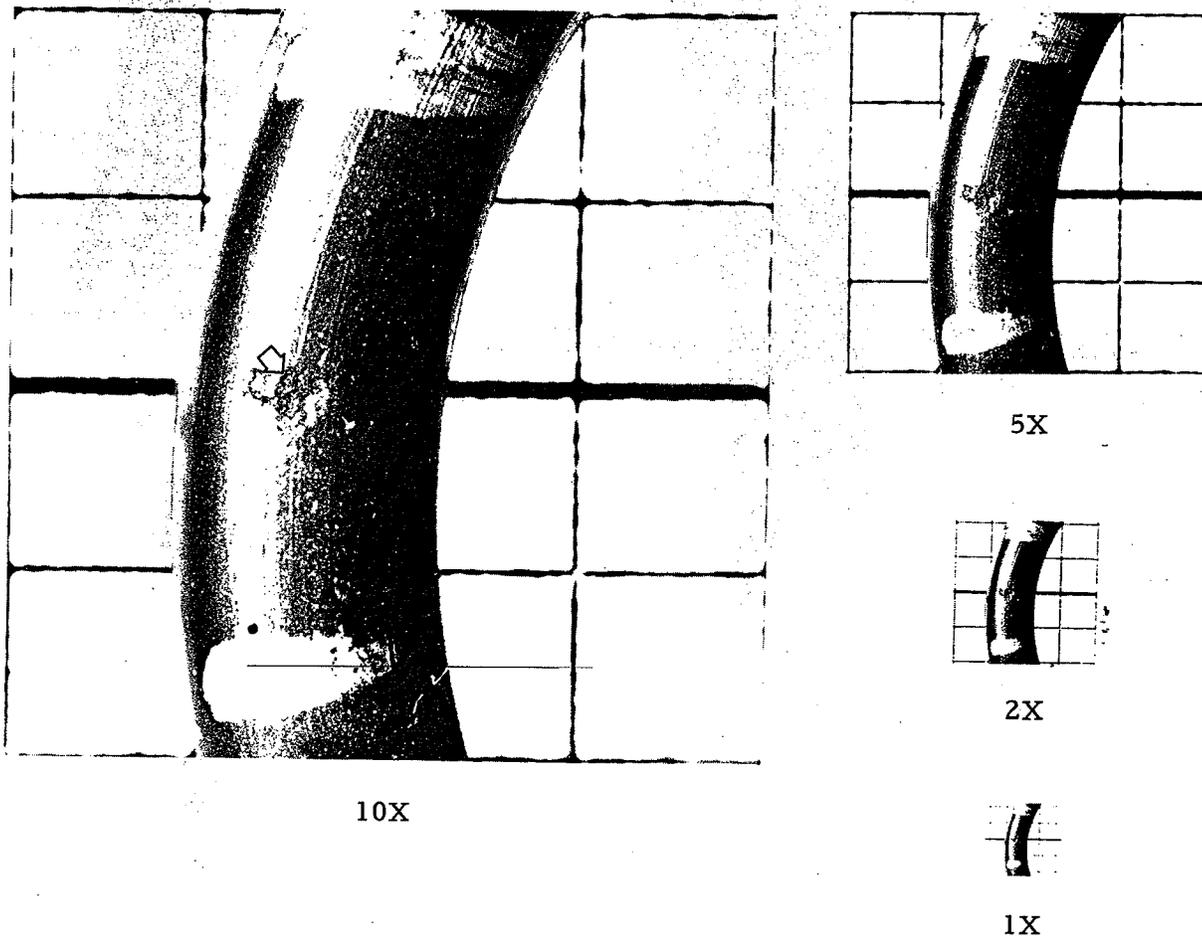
Mold deposit defect, major, W = 0.139 inch.
